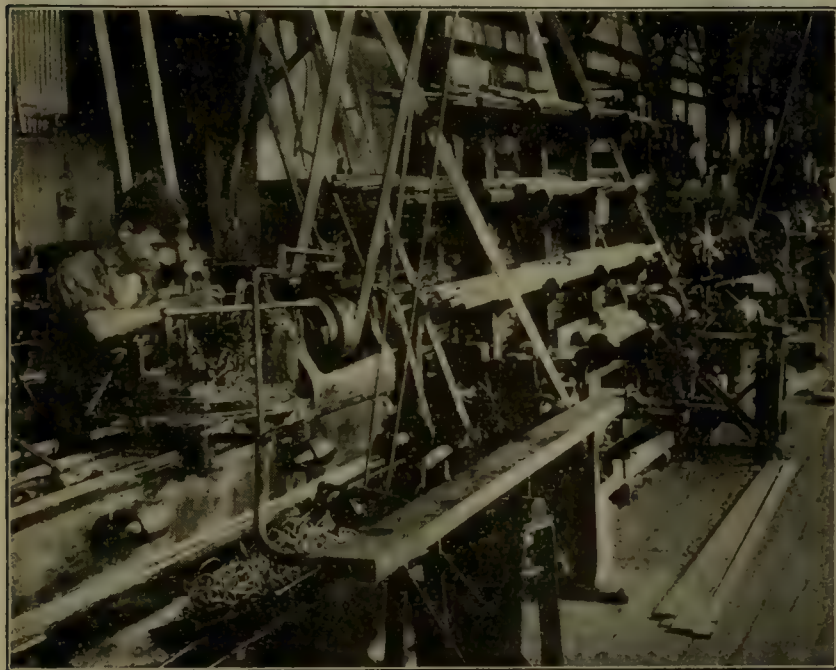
Tool Steel Rack and Cutting Off Machine.
